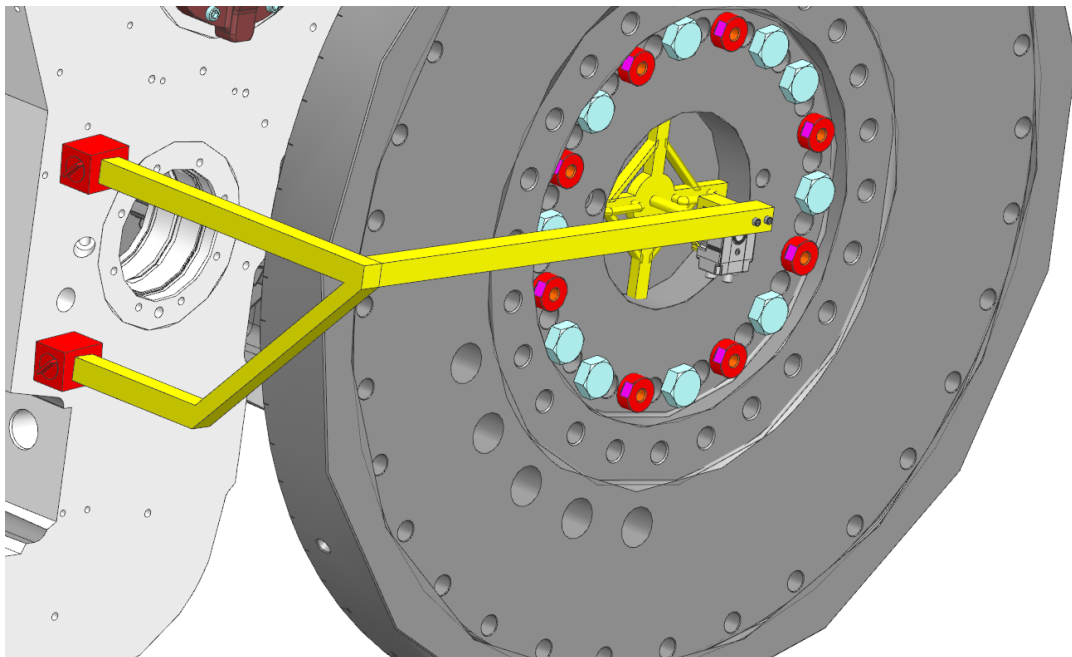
Concept of crankshaft measuring tool assembled to the engine.
